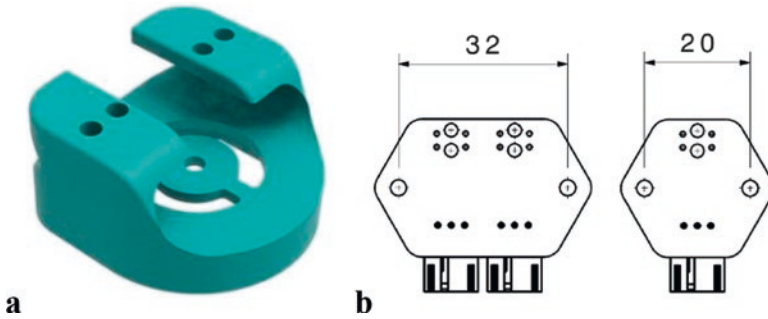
(a, b) ZUM Kit module and dimensions between holes in both ZUM Bloq in millimeters
